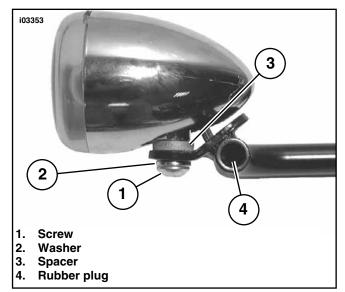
Installing 2-3/8 inch Signal Lamps (Deuce Style)
